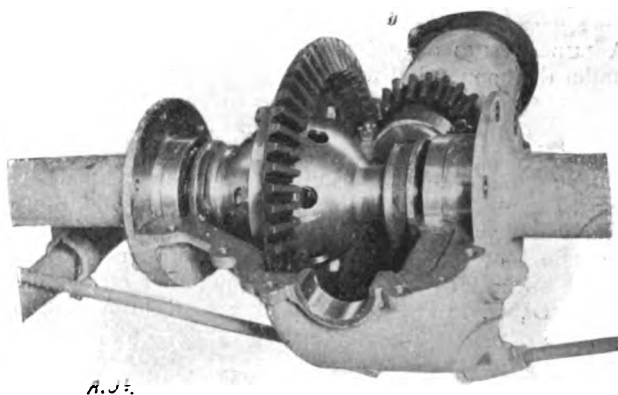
View of the differential on the 17-25-h.p. Hotchkiss Car, showing the horizontal joint in the casing.
